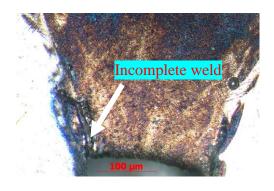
The weld profile specimen of 2.8 kW and 15 liters/min.
